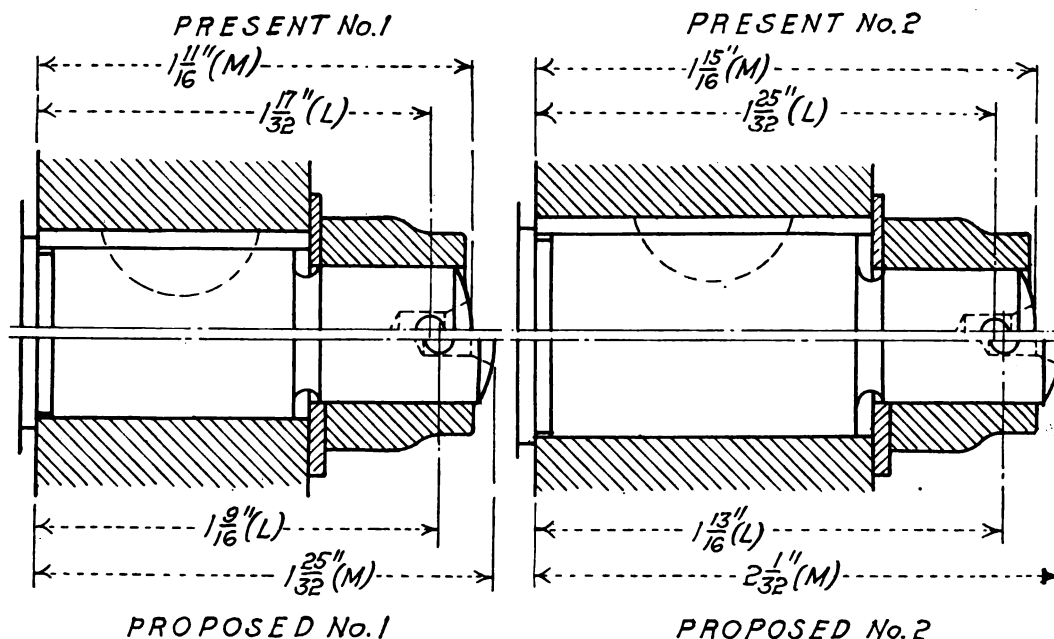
PROPOSED CHANGES IN GENERATOR FLANGE MOUNTINGS
